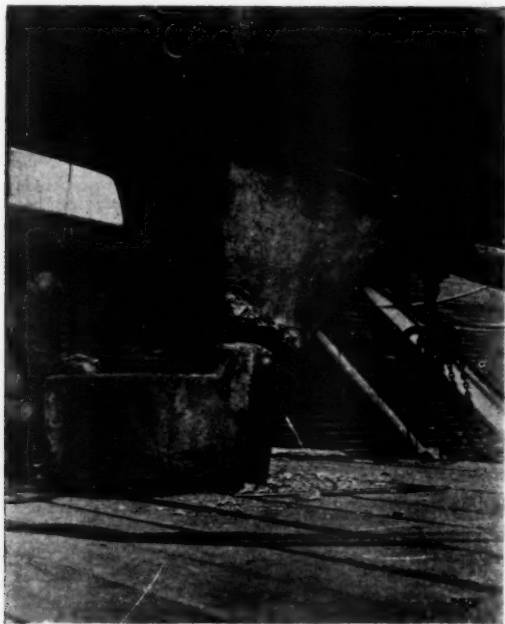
FRACTURE CUT OUT LEAVING SPACE FOR THERMIT STEEL TO ENTER
